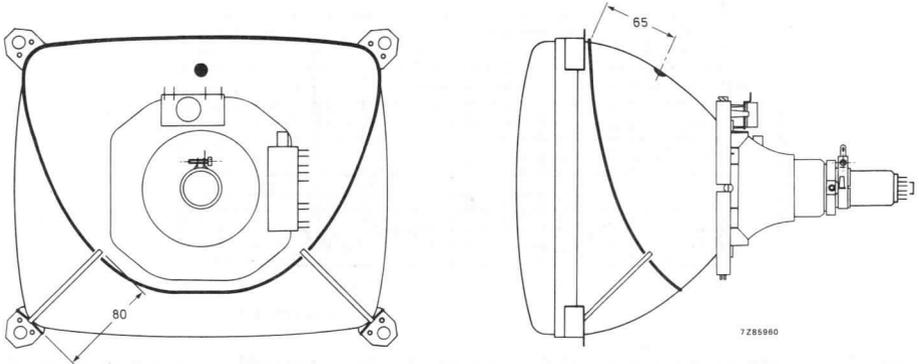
Position of degaussing coil on the display tube; dimensions are given in mm.
